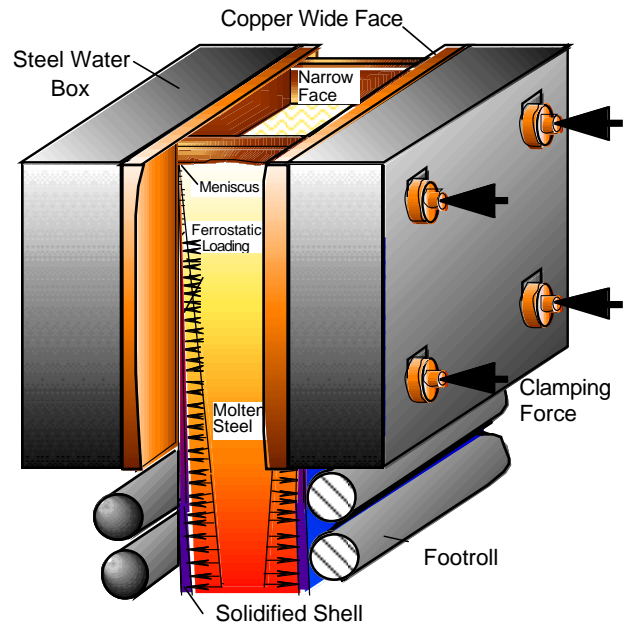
Cutaway of continuous casting mold showing loading on the wide face copper plates.
